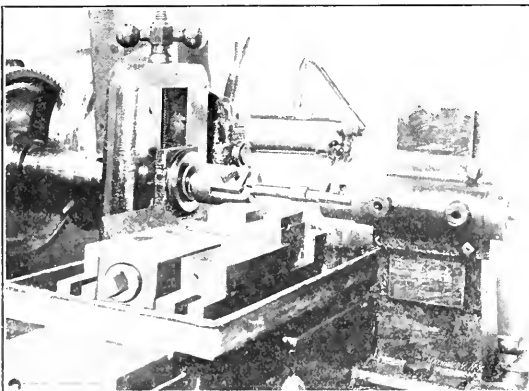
Form Turning on the Milling Machine. The Barrel Rotates Tail Spindle; Form Cutter Attached to Table.
